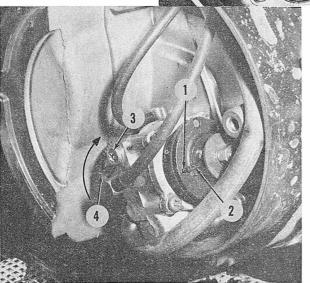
Adjust pump cable so that marks align as slack is just taken up in throttle cable.
